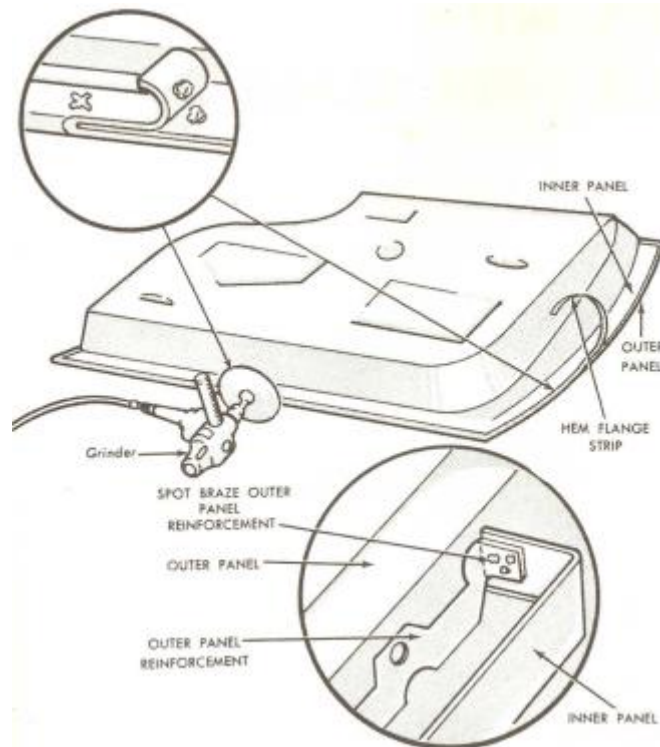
45 Removing hem flange of door, prior to replacing the outer panel.
